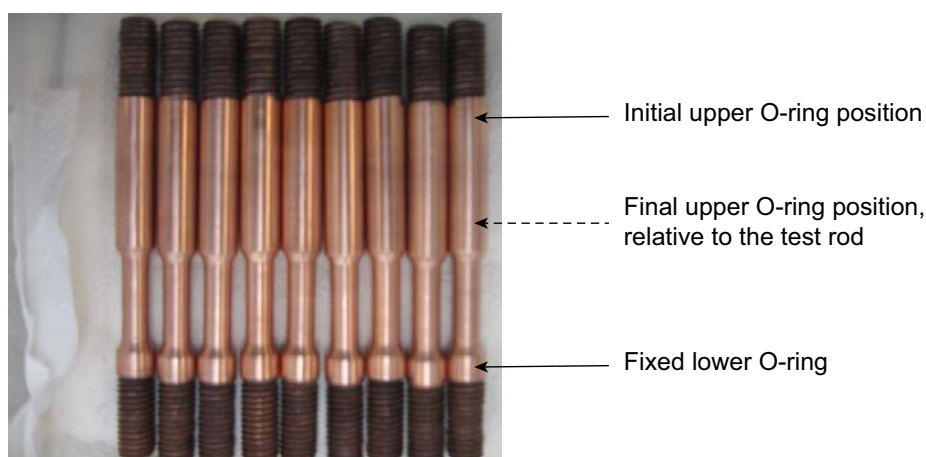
The collection of nine test rods produced. Approximate locations of O-rings used to seal the inner test environment from the atmosphere are shown.
